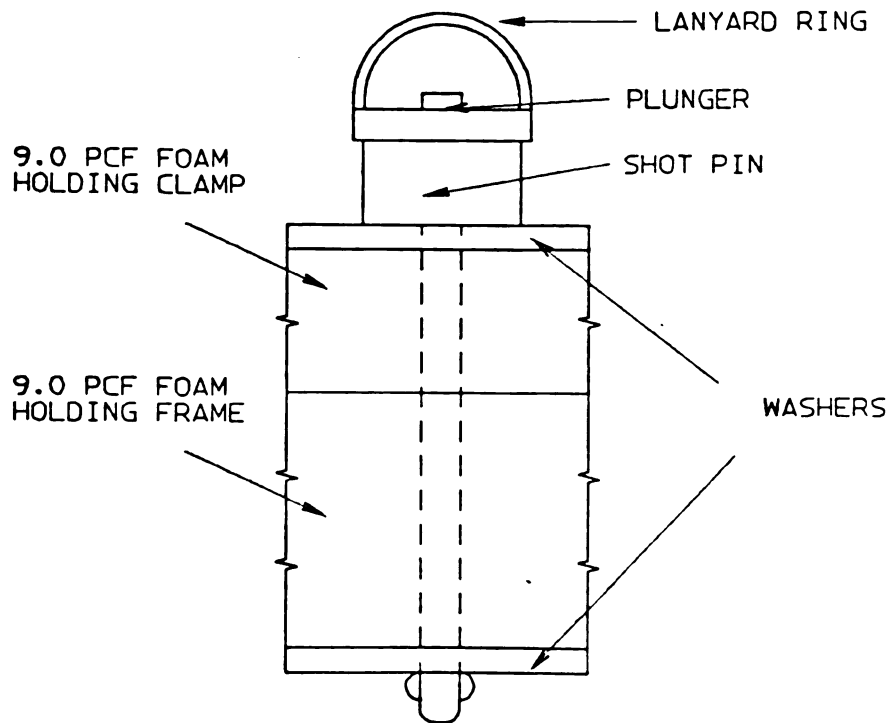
Cross Sectional View of the Clamp/Shot Pin Assembly
